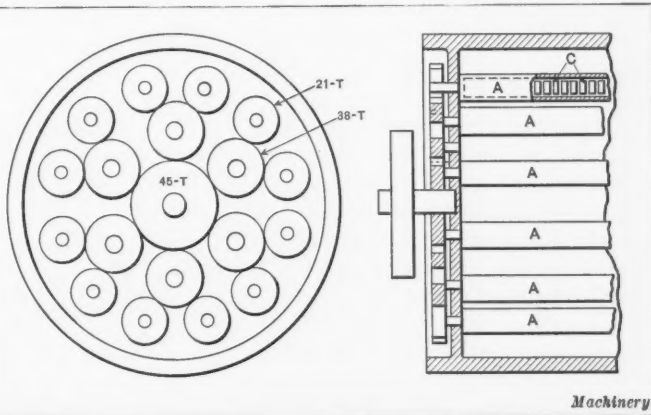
Special Machine designed for polishing Inside of Twister and Spinning Rings
